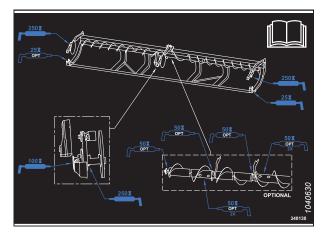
Decal for Double-Knife Header with Three-Piece Upper Cross Auger
